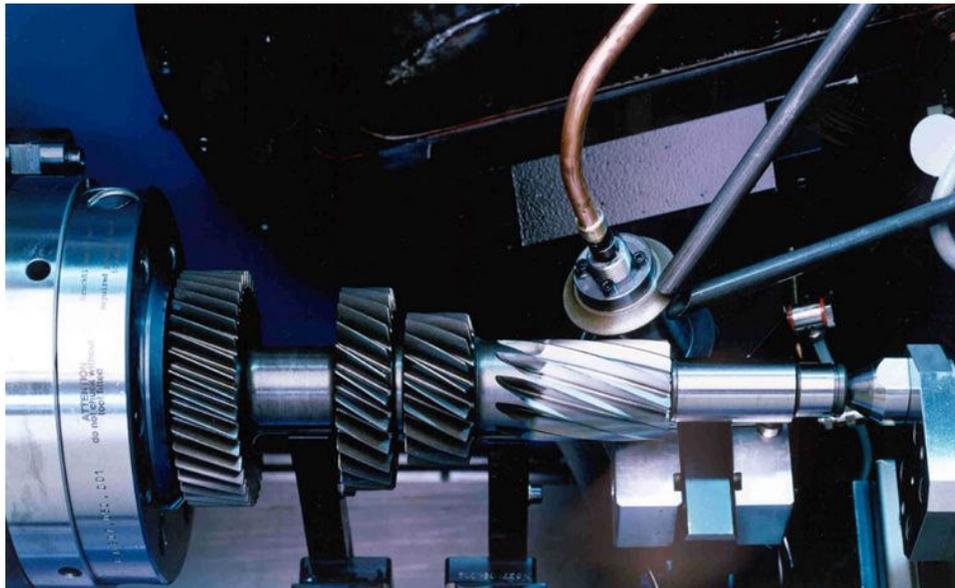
With a small diameter form wheel it is possible to grind gears close to a shoulder
